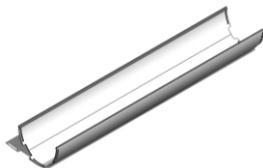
CAD Part - 0022-DE-CAD-002 - planter gutter
